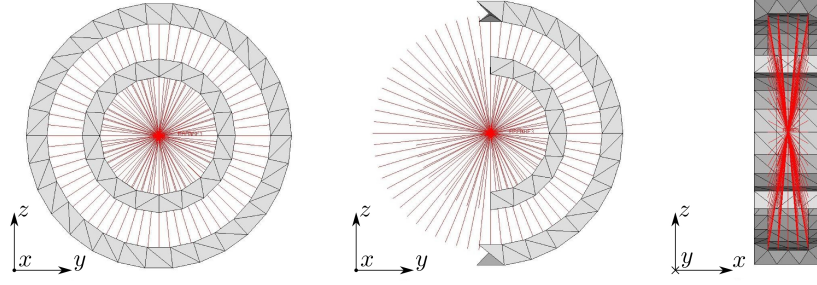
Roller bearing inner and outer ring with adjoining elements (left), cut view (middle) and section view (right).
